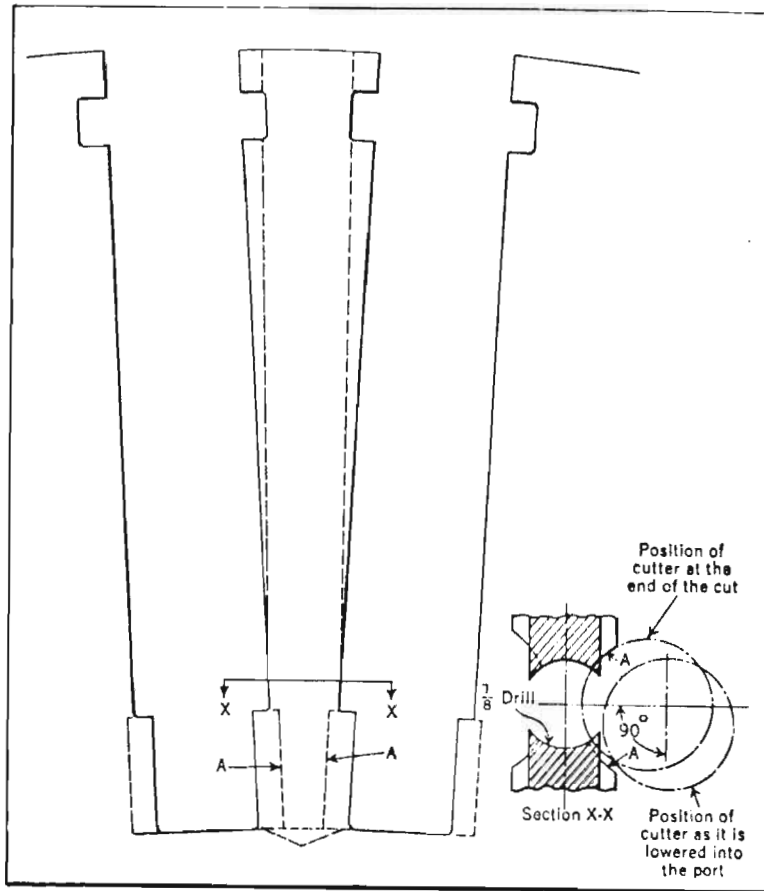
Diagram of Work, Showing the Irregular Recess Cut by the Tool in Fig. 8
